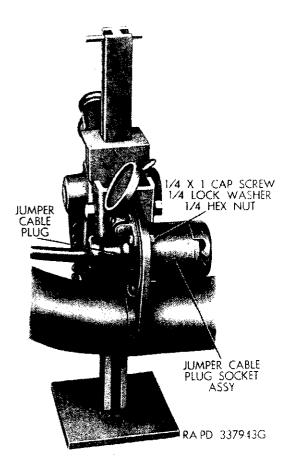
Jumper cable plug socket assembly mounted on trailer.
